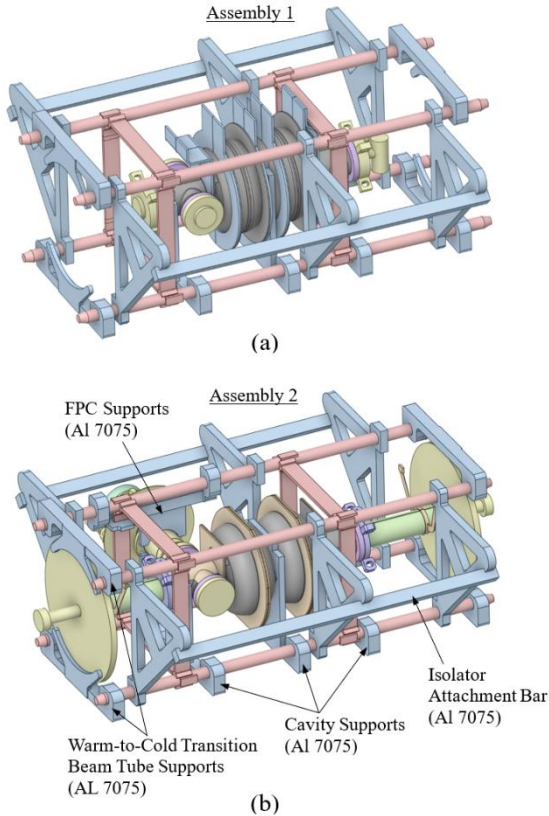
(a) Inner frame assembly 1, mass ~136 kg, 4 isolators. (b) Inner frame assembly 2, mass ~205 kg, 6 isolators.
